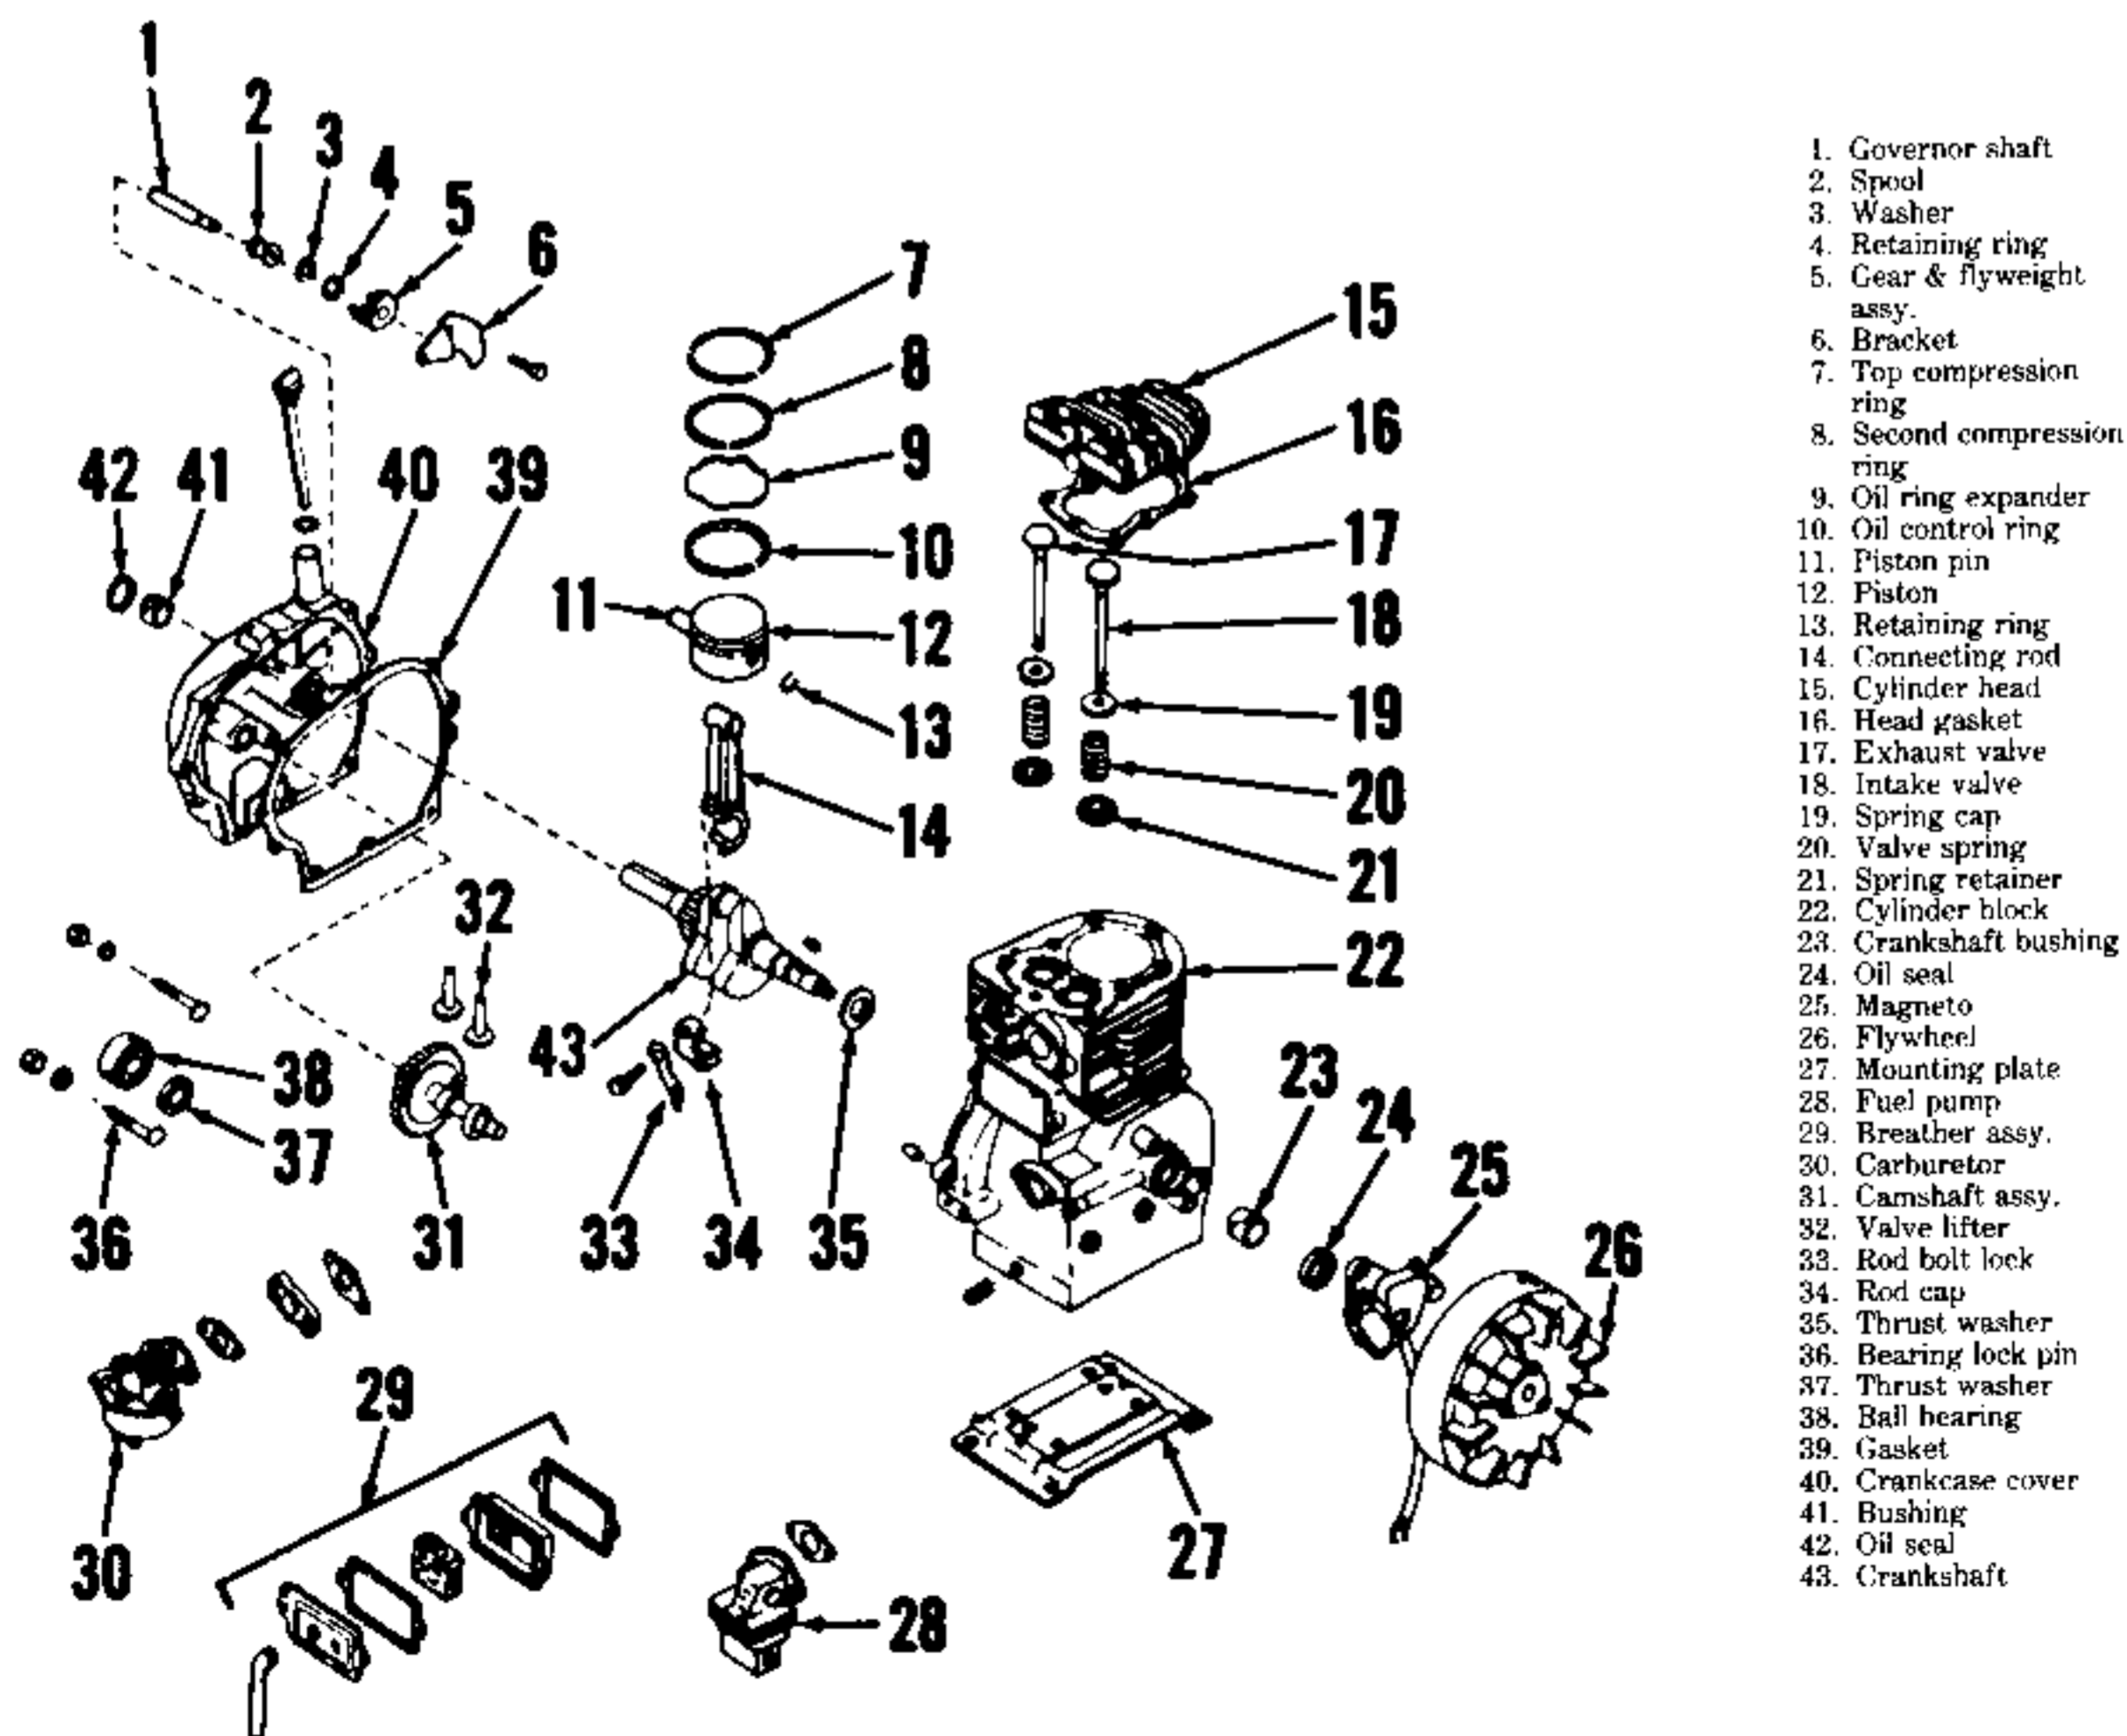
Exploded view of horizontal crankshaft engine typical of Models HH70, HM70, HM80 and HM100. Engines may be equipped with crankshaft bushing (41) or ball bearing (38) at pto end of shaft.
